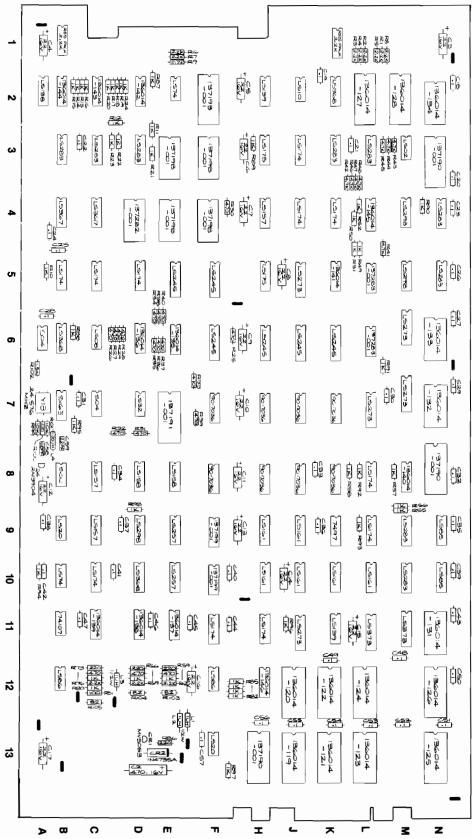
Pole Position Video Printed-Circuit Board Assembly A039187-21 B
